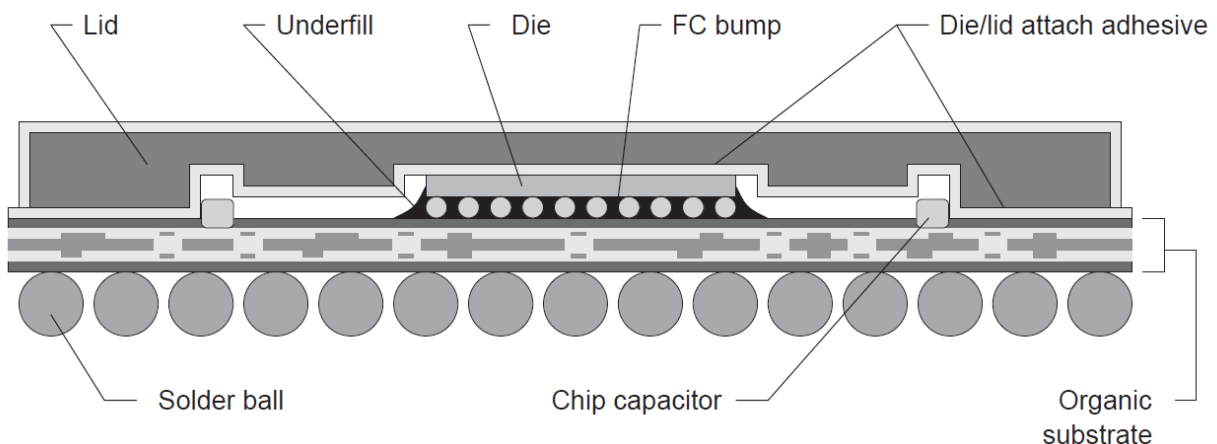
Flip Chip Ball Grid Array Package (FCBGA) [Texas Instruments]
